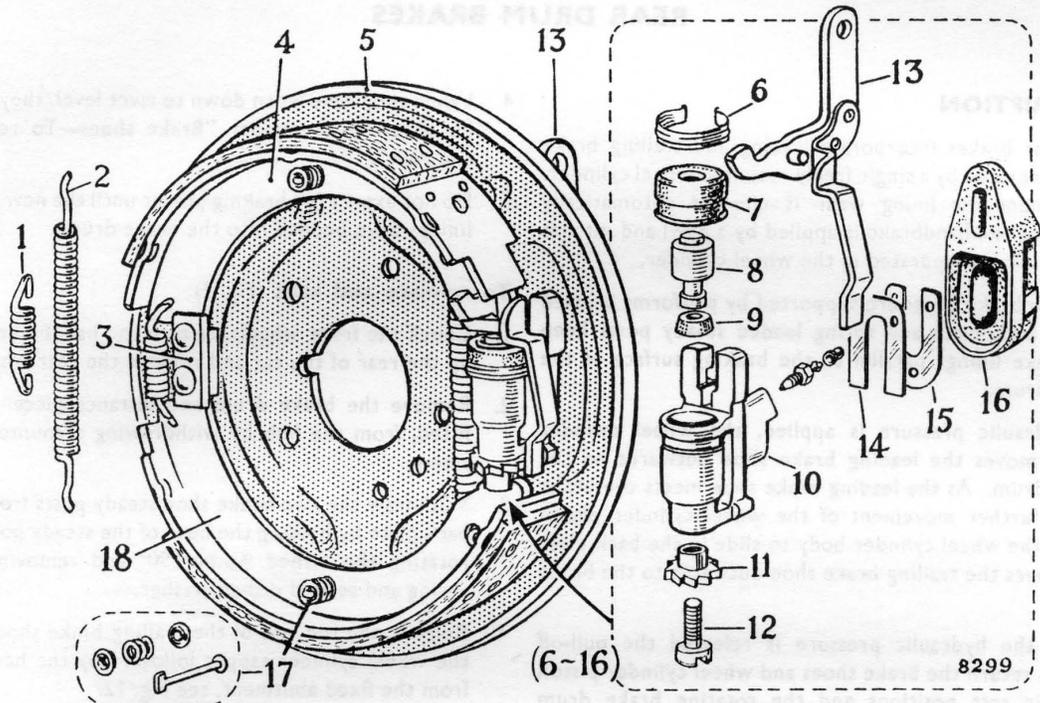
Exploded view of left-hand rear brake back plate assembly
